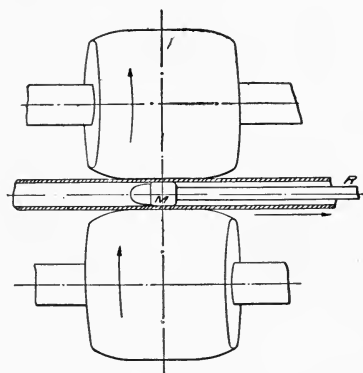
Making Seamless Tubes. Tube Reeling Machine.
